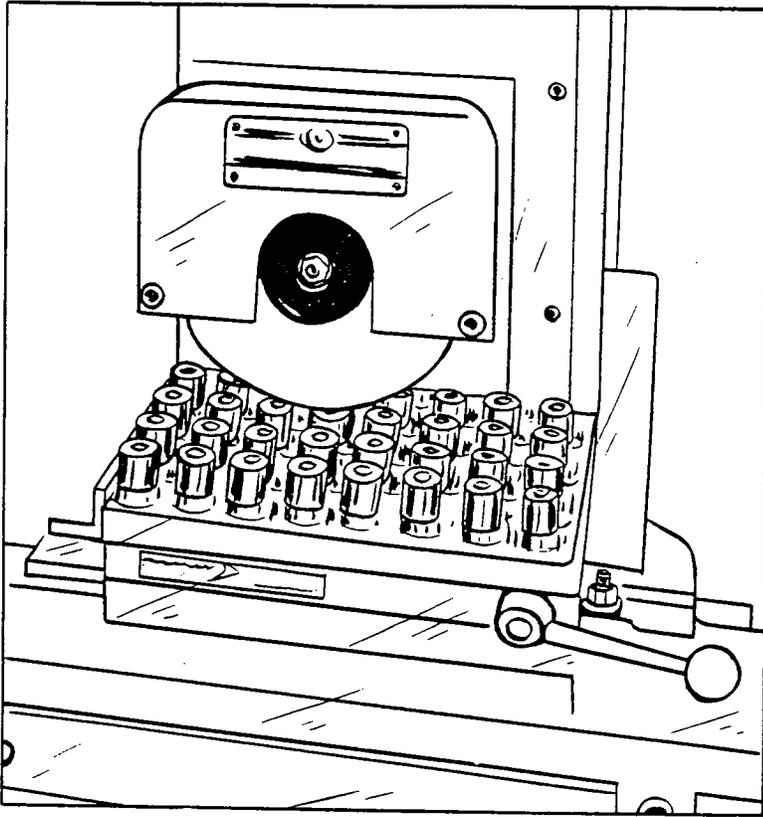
A representative production job grinding the surfaces of thirty-two pieces with one loading of the permanent magnet-type chuck.
